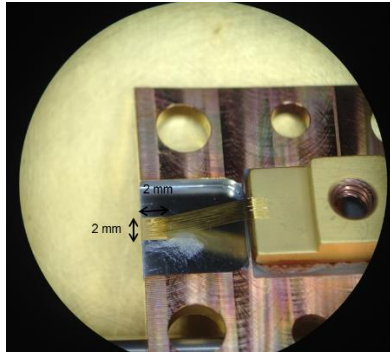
Fabricated laser chip array, flip-chip bonded onto an indium-coated sub-mount. The dimensions of the chip are 2 mm by 2 mm.
